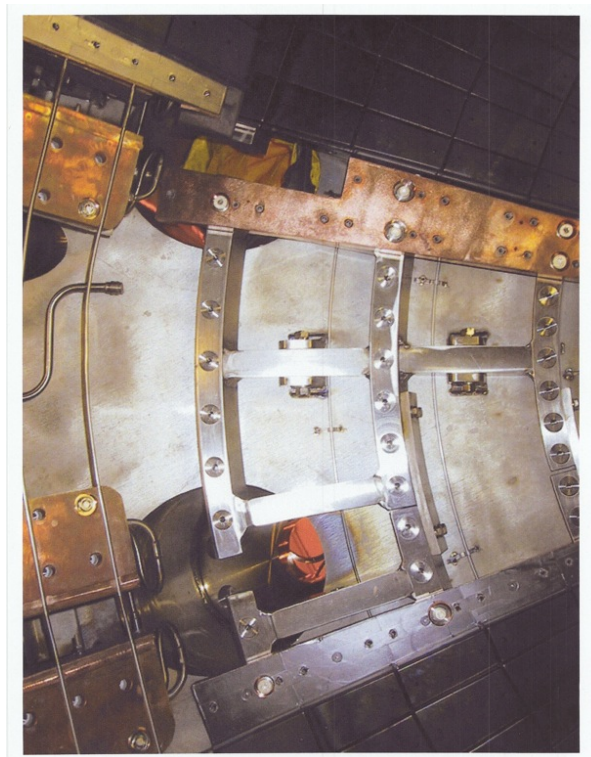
Lower Outer Divertor "Barbeque" Rails
